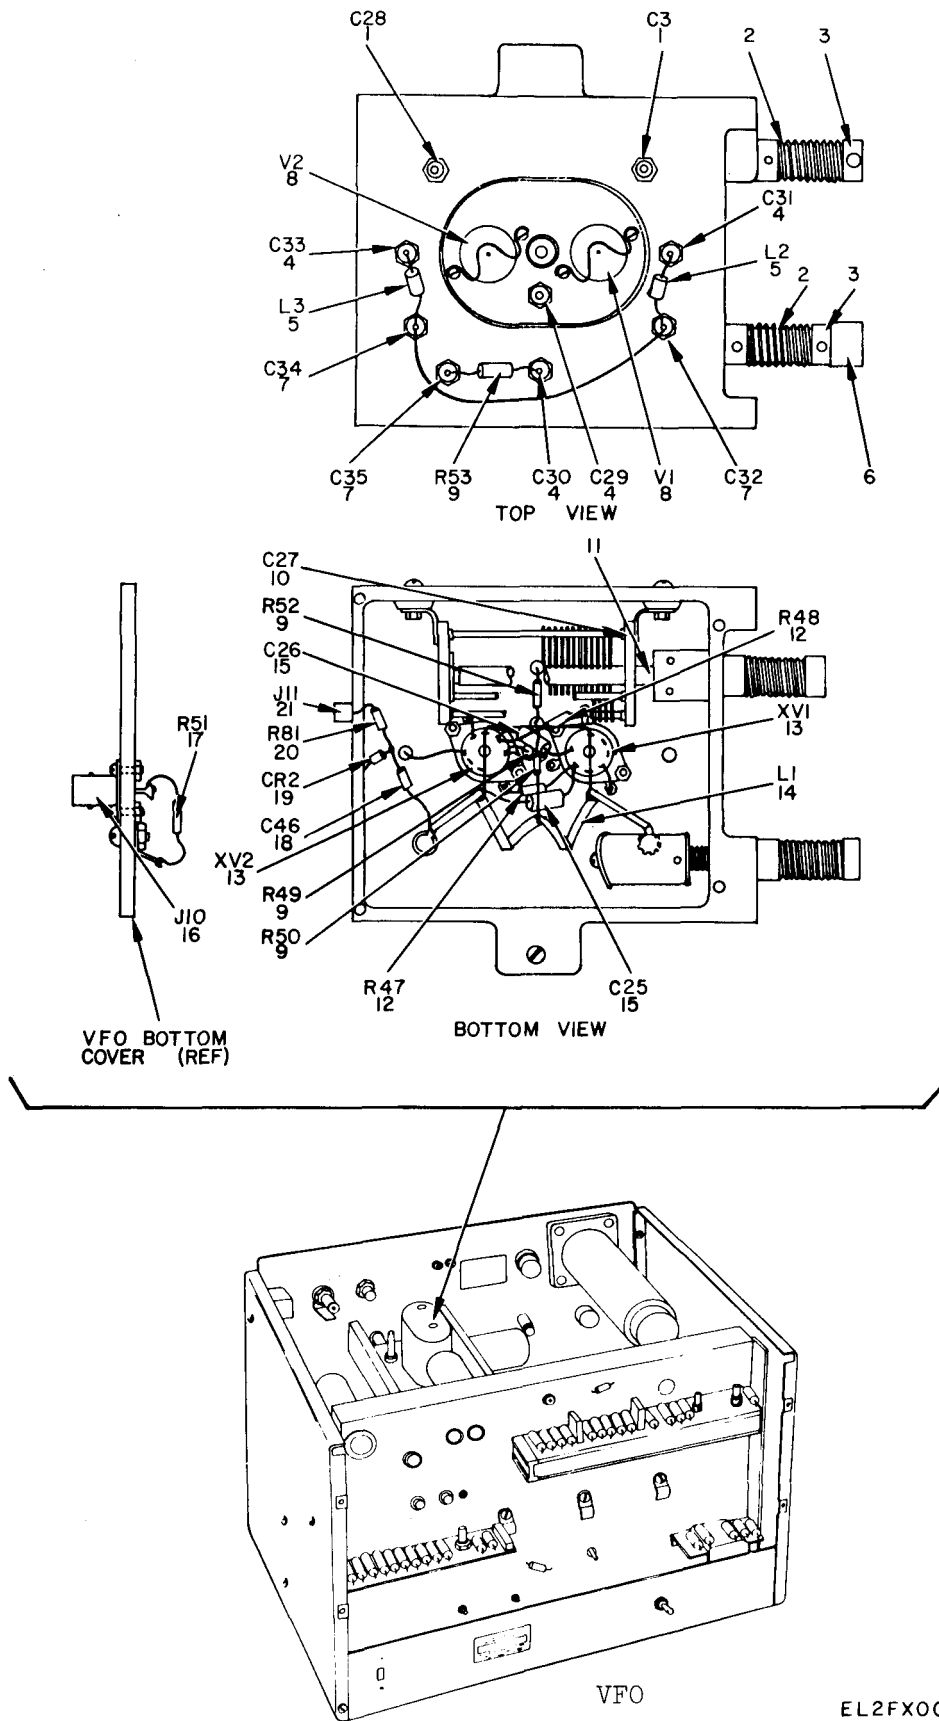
Frequency Comparator CM-77A/USM, exploded view (Sheet 1 of 3).
